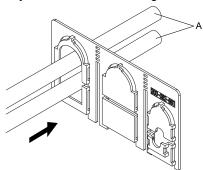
Clip the Cutaway Section of the Wiring Cover
